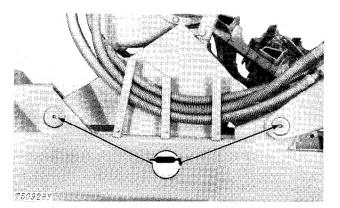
Draft Frame and Elevator Pivots-Right Side Shown (4 points)
